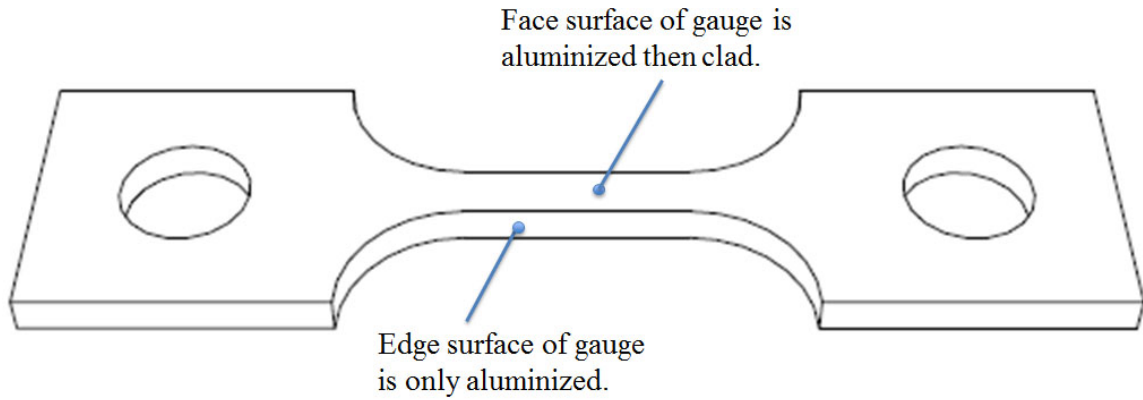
Schematic of dog-bone creep specimen indicating the face surfaces of the gauge to be clad and aluminized, while the edge surfaces are aluminized only.
